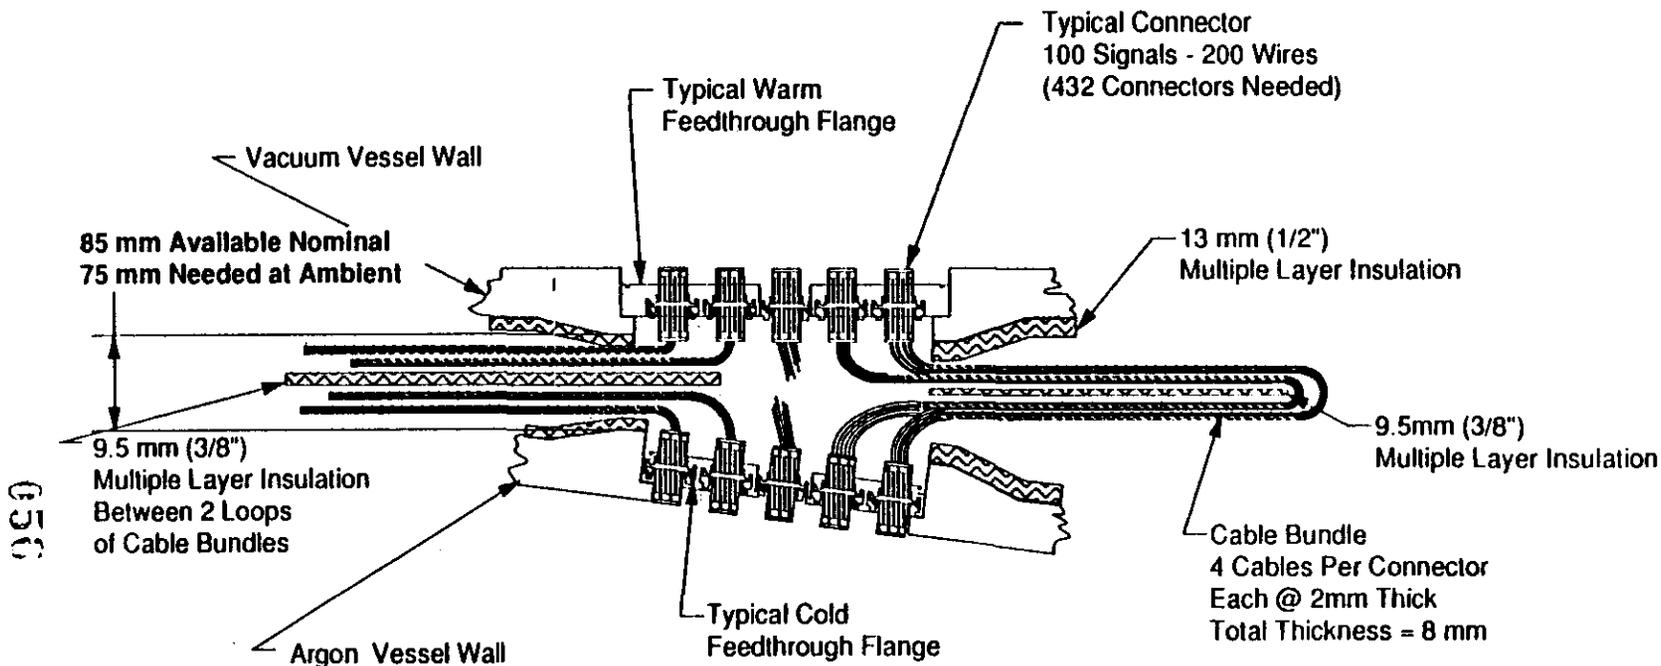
Barrel Electronic Feedthrough Section Showing Space Required for Cabling
